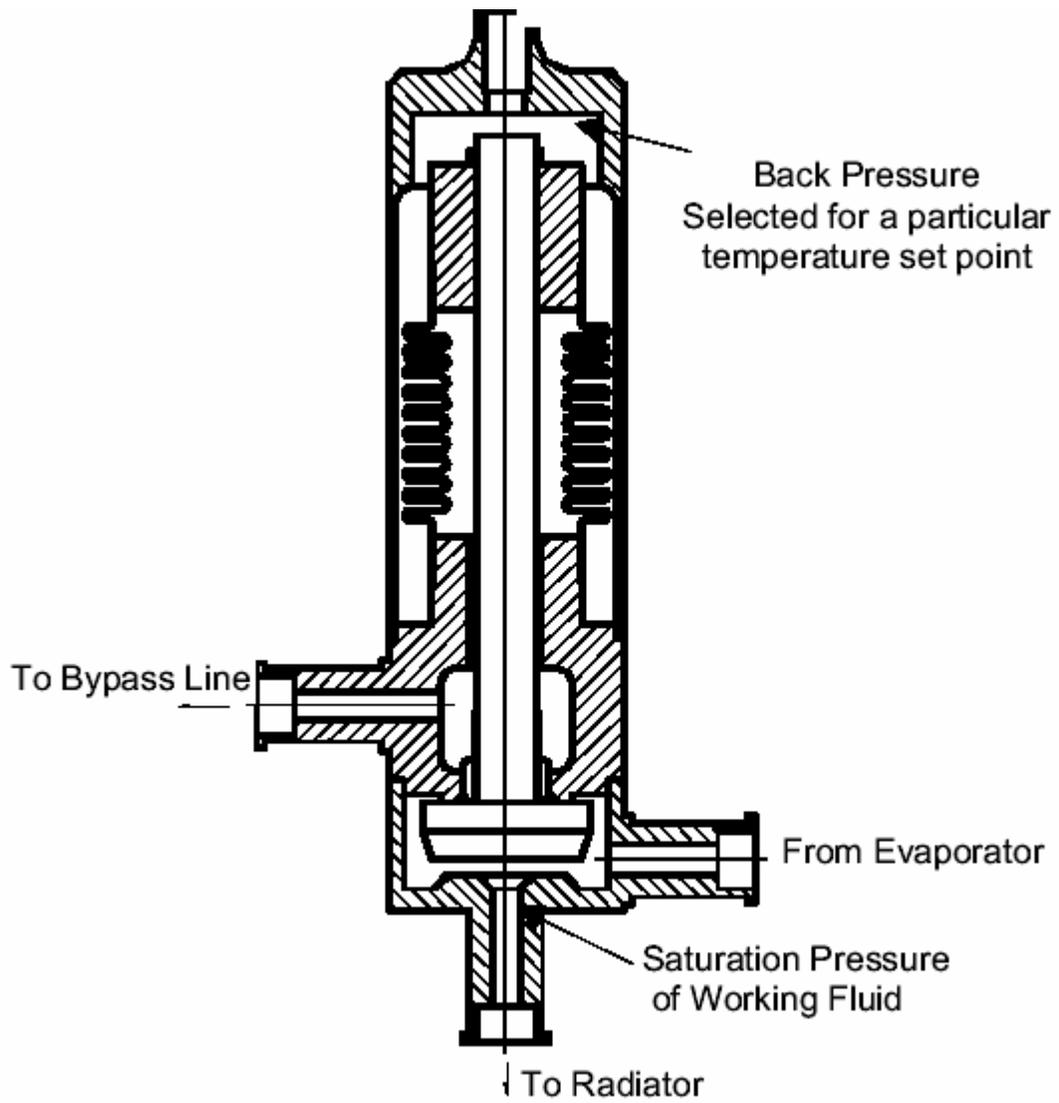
LHP Bypass Valve Cross Section
